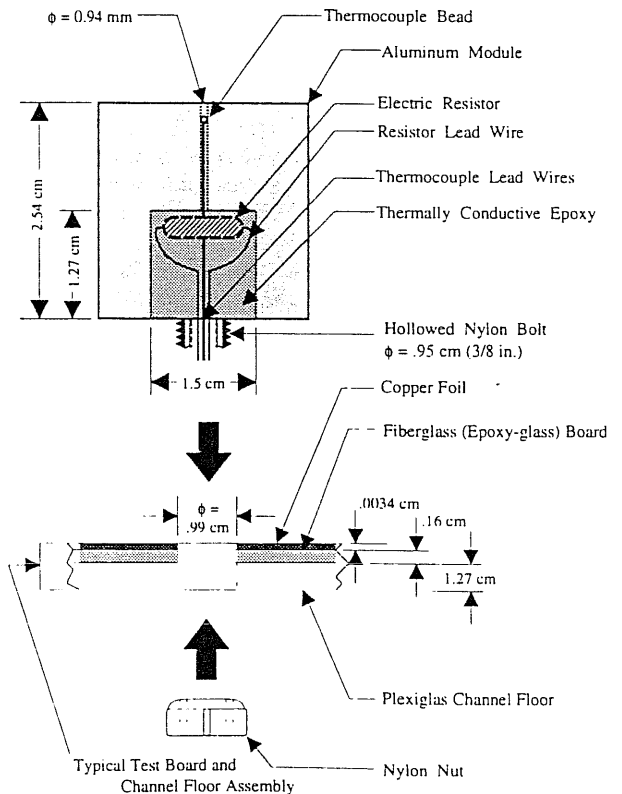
Detailed plan-view of a full-size cubic aluminum module and a typical test section channel floor assembly.
